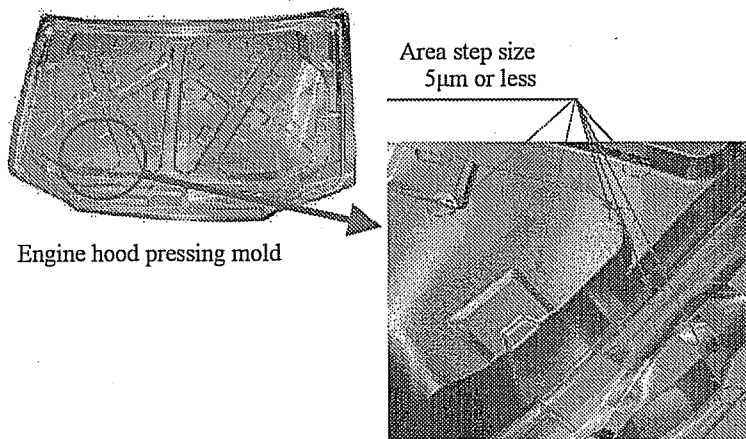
Size of step between shaped surface and cornering after 42 hours of machining
